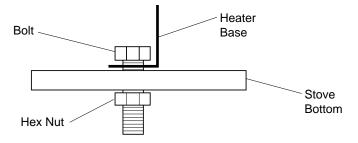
Fastening Heater Base to Stove Drop Bottom
